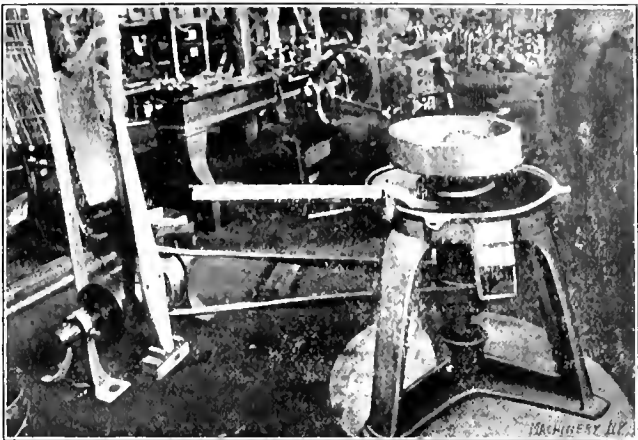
Fly-wheel Balancing Machine with Wheel in Place
